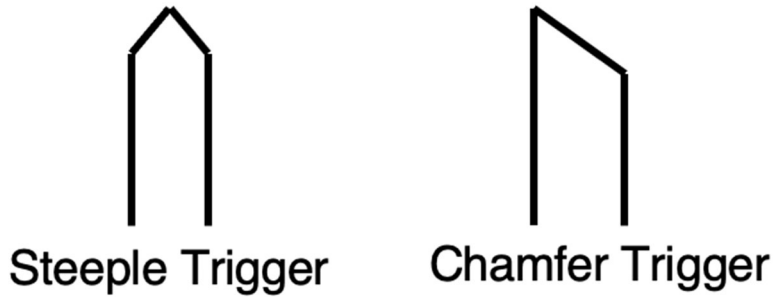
Schematic drawings of two crush trigger mechanisms.
